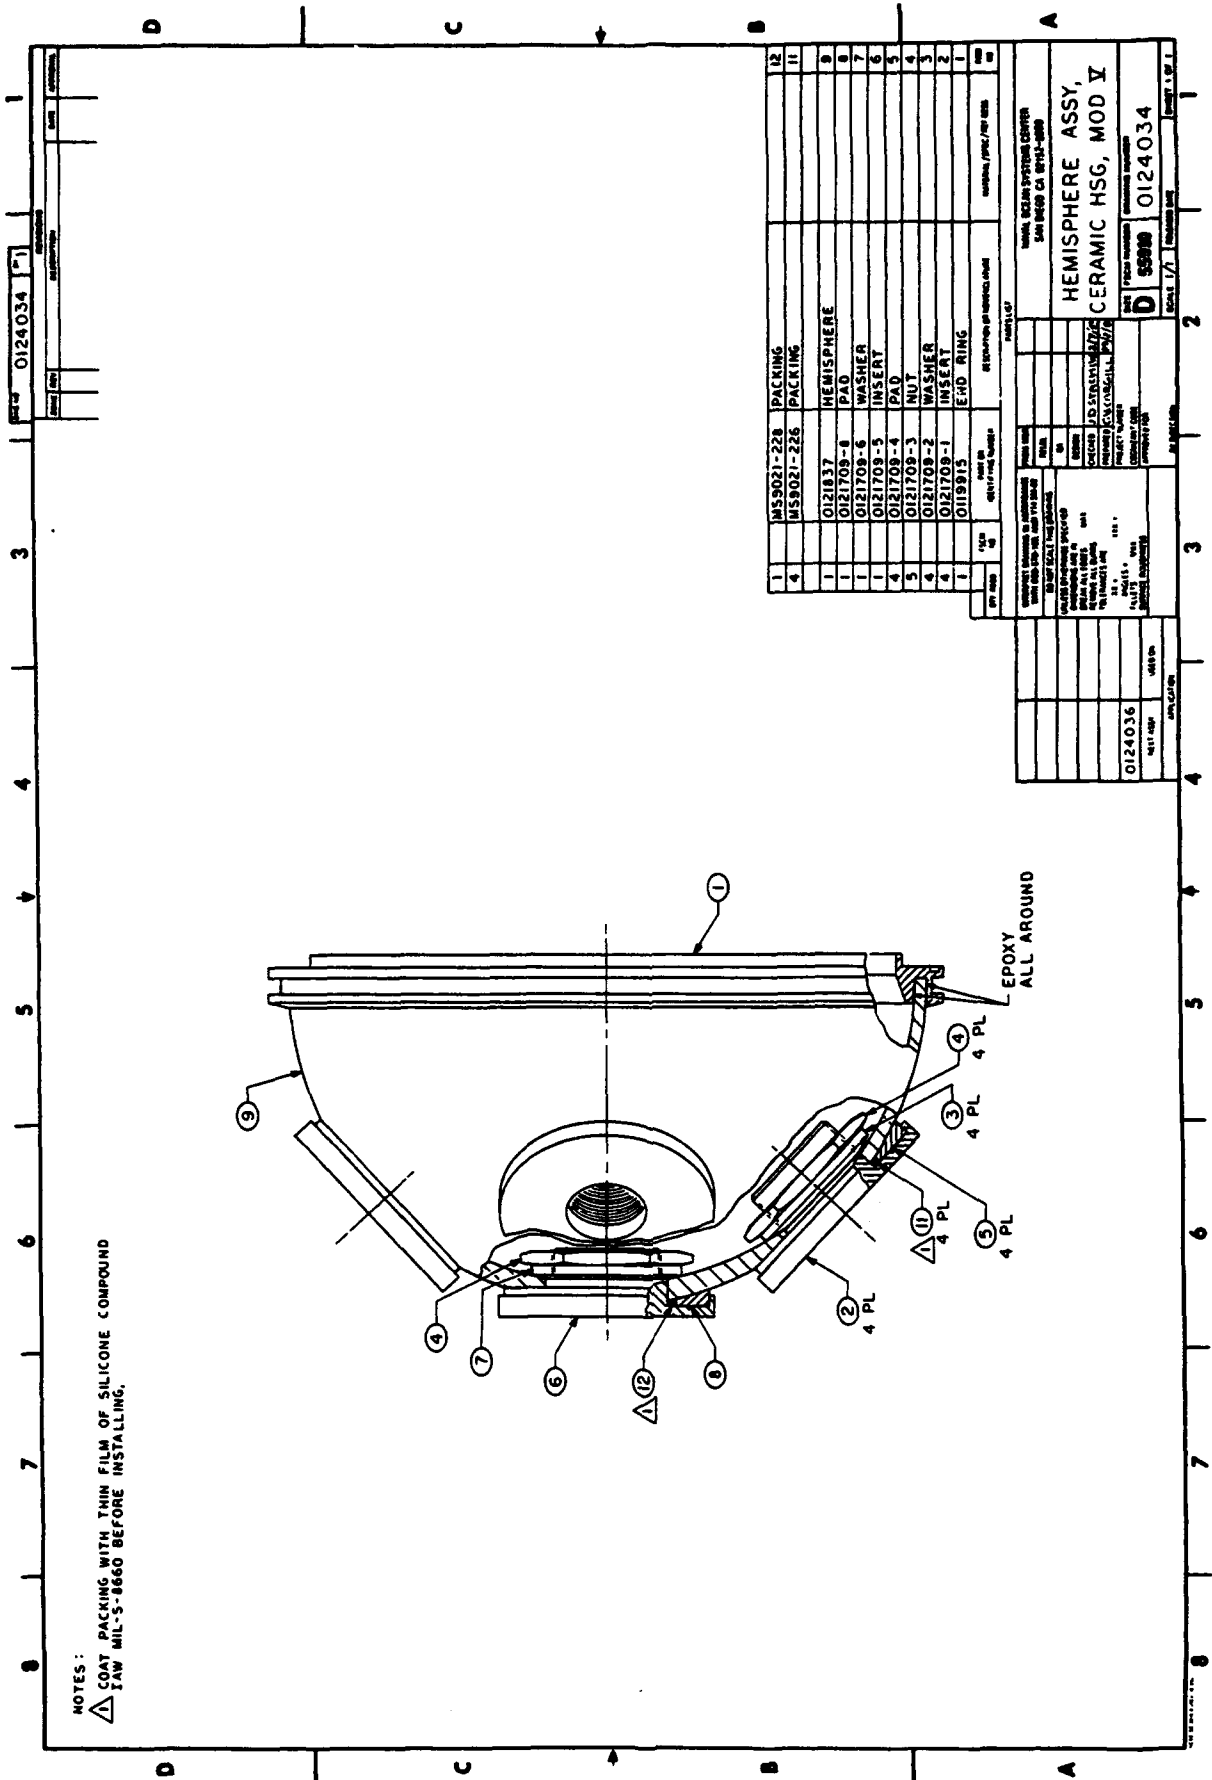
Mod 5 ceramic bulkhead assembly; list of components.
